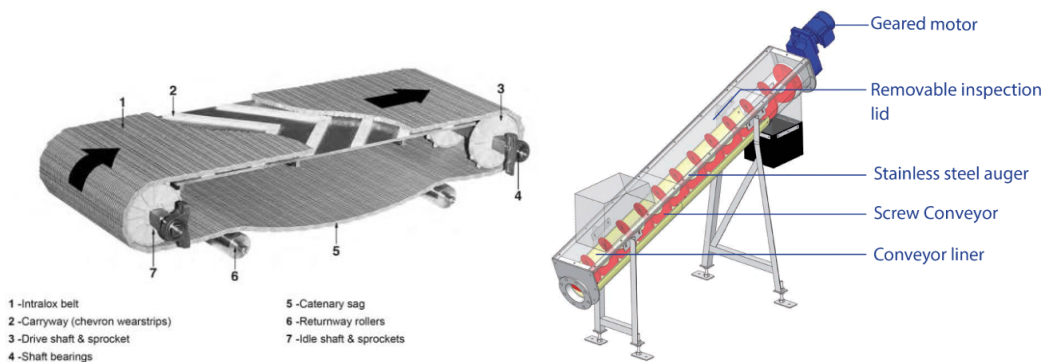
handling equipment, conveyor belt and shaftless screw conveyor.
